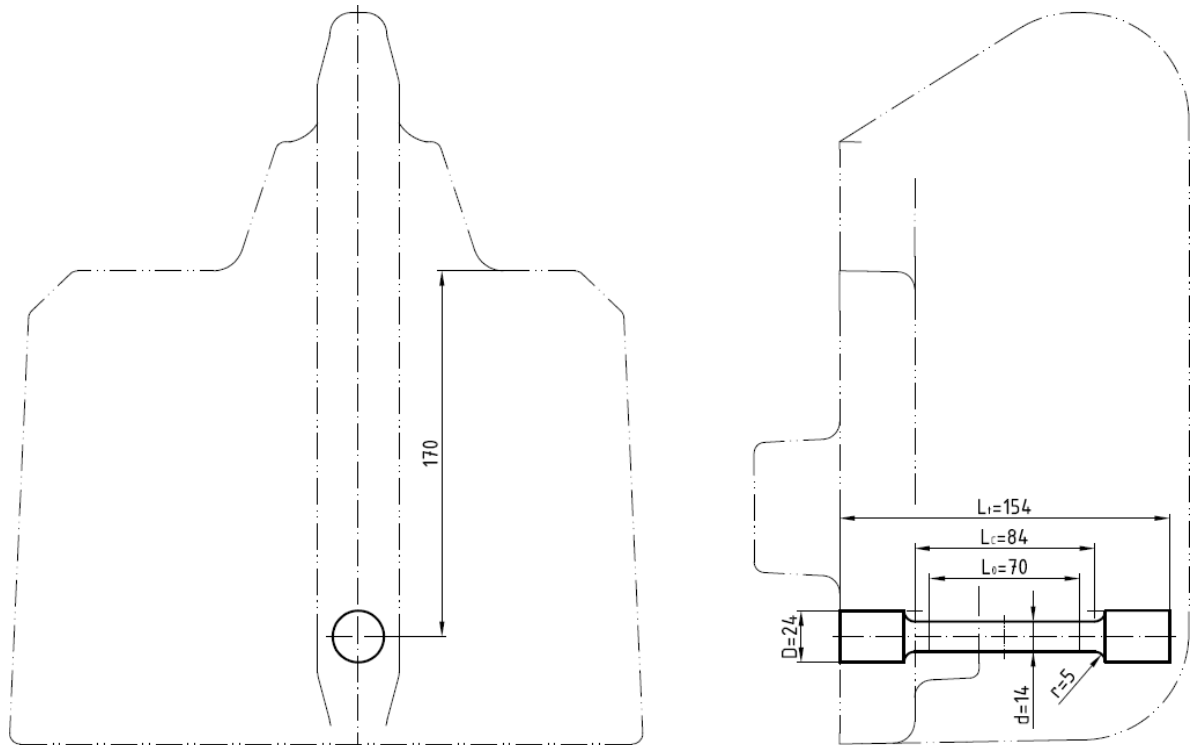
Tensile test specimen taken from the lashing of the coupling plate
